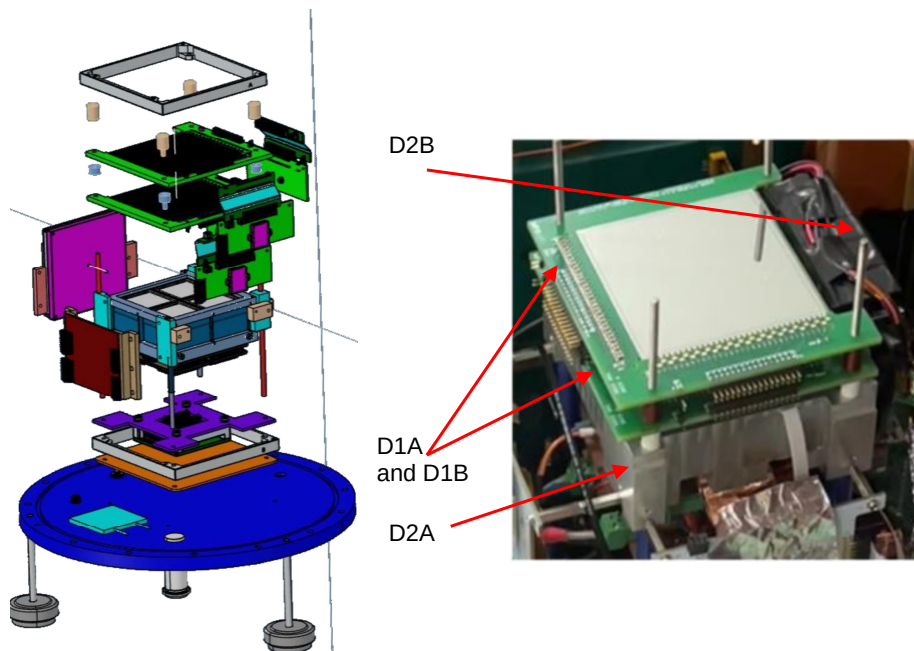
CAD drawing and final design of the COMCUBE balloon prototype without enclosure.
